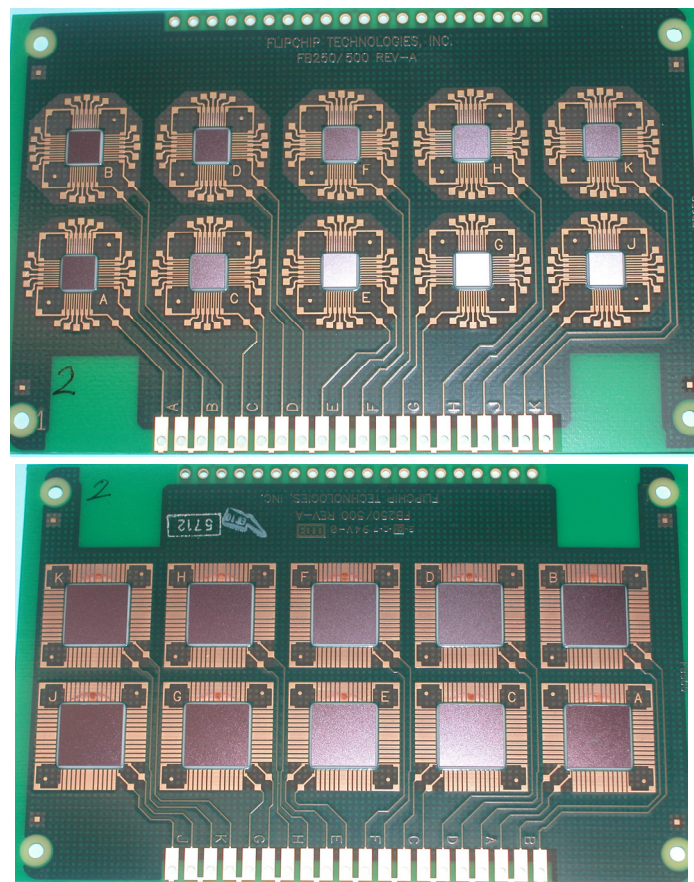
Optical photographs of the flip-chip test boards of FB250 and FB500.
